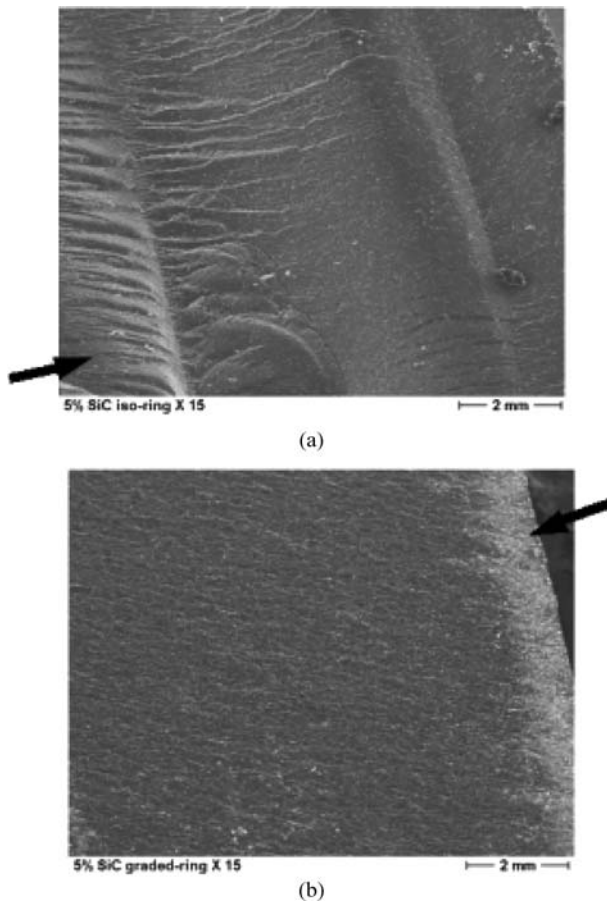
Fracture surfaces of a) homogeneous and b) FG ring. The arrows indicate the direction of failure initiation.
